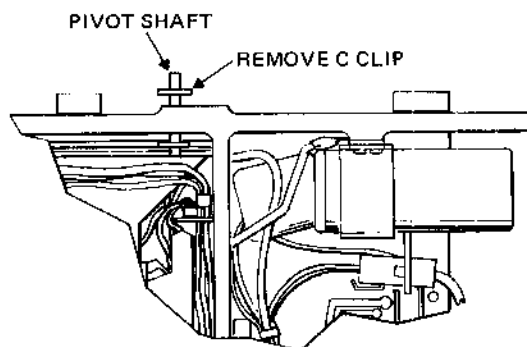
CARTRIDGE GUIDE REMOVAL
